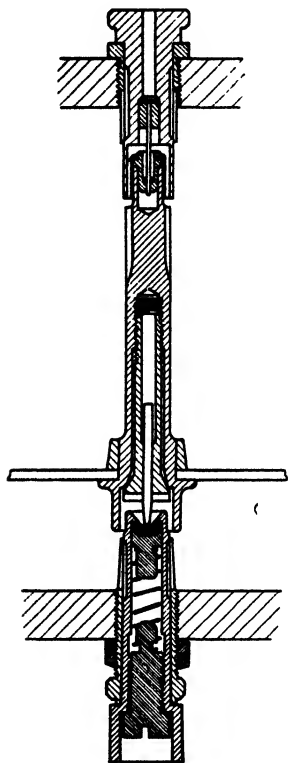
Sectional view of rotor and bearings in C. & H. single-phase meter.
